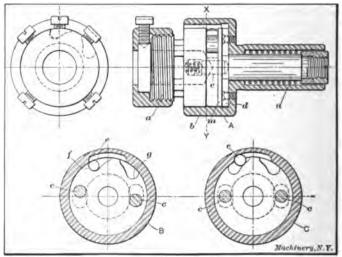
Illustration showing Operating Parts of Releasing Button Die Holder
